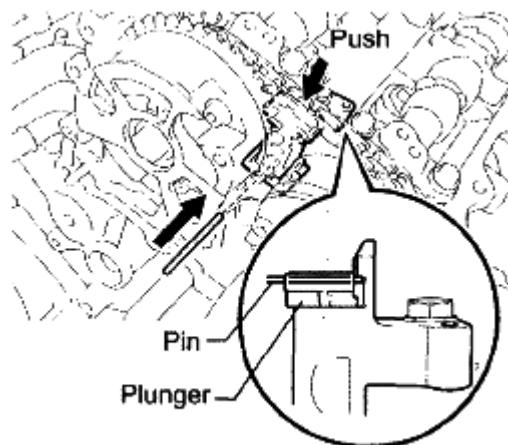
Inserting Pin Into Hole For Fixing No 3 Chain Tensioner
